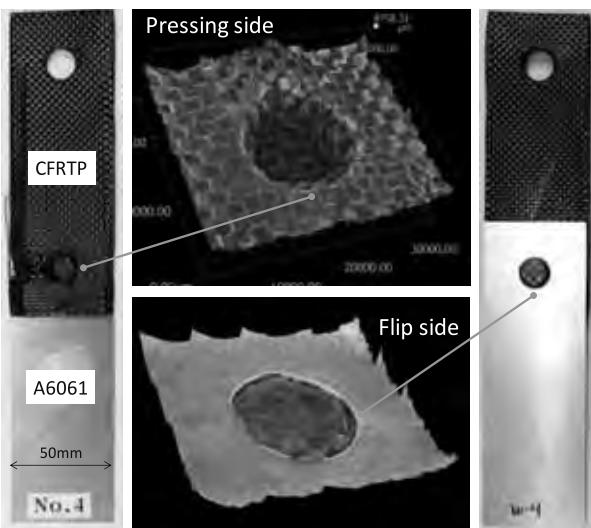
Appearance of a swaged joint of CFRTP sheet to A6061 sheet using a servo press.
